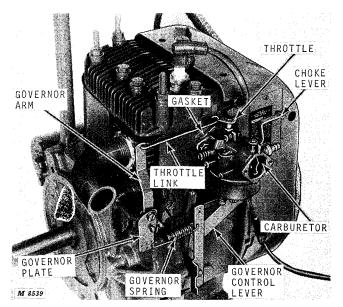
Carburetor Assembly (Air Filter Base Removed for Clarity)
